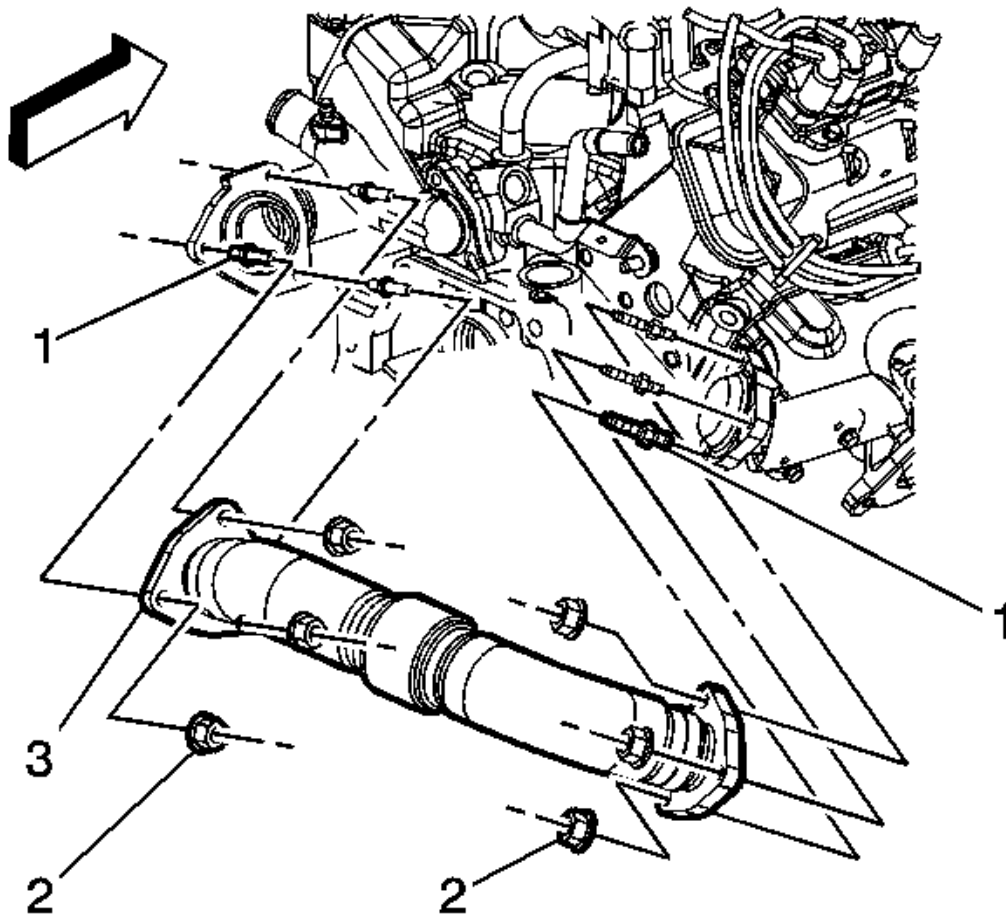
View Of Exhaust Crossover Pipe, Studs & Nuts
